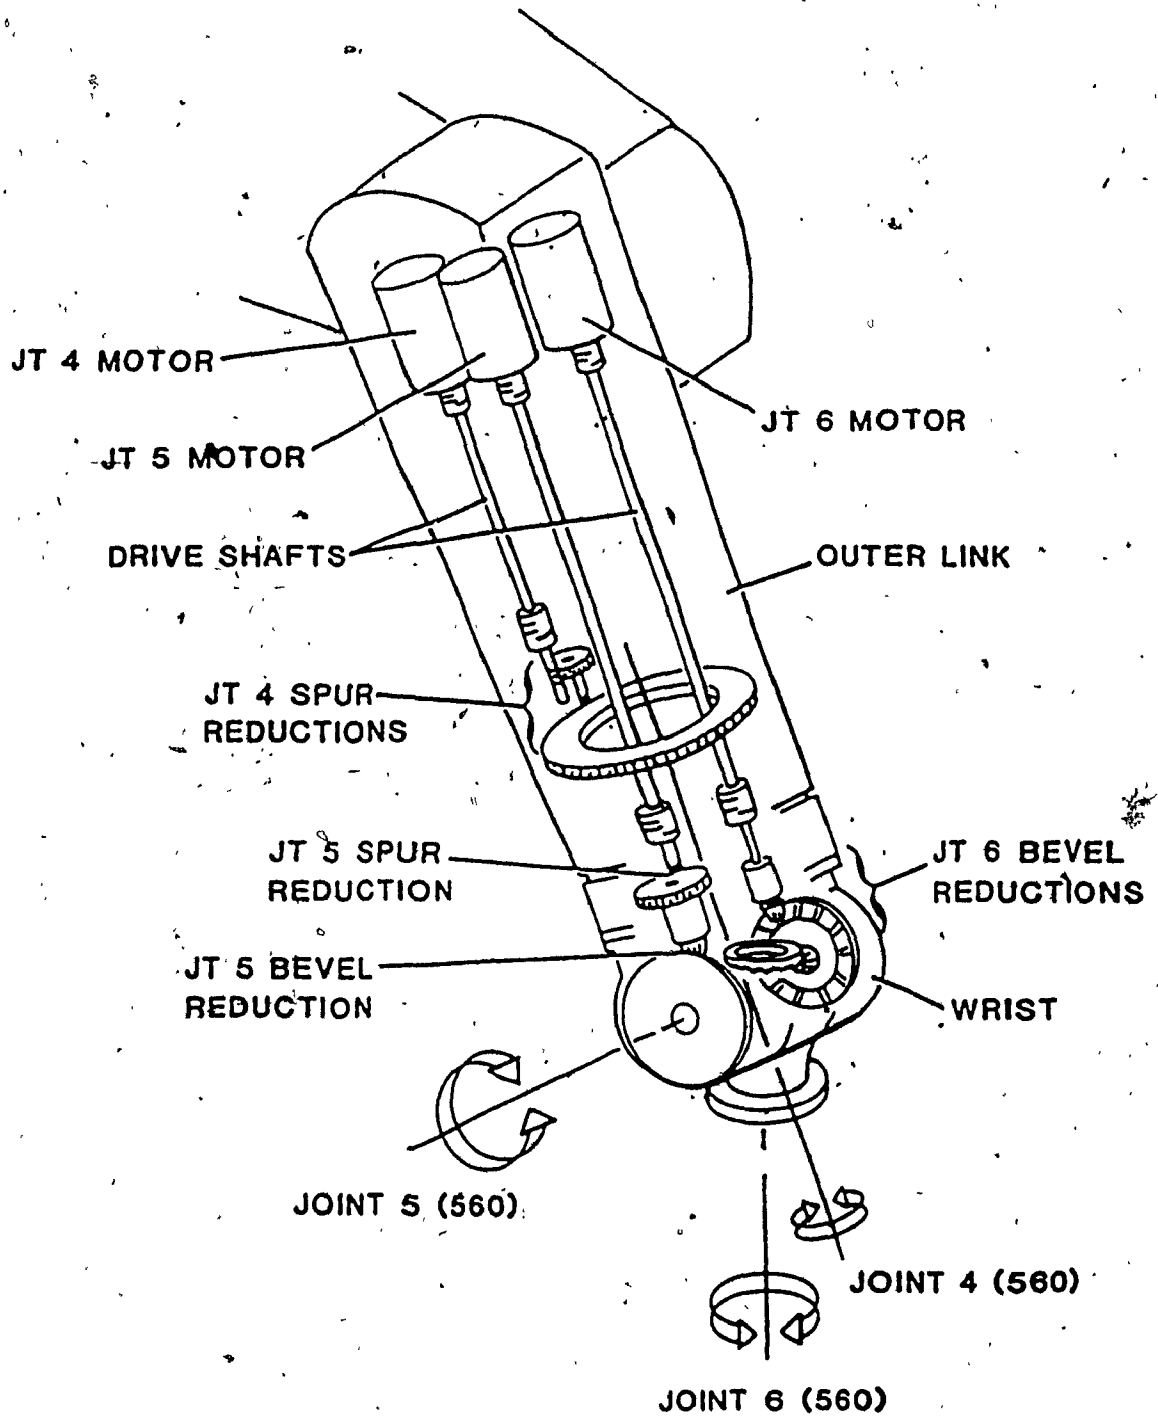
Mechanical arrangement of the Puma 560 robot wrist joints
